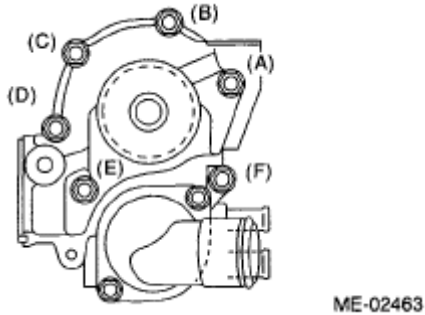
Identifying Tightening Sequence Of Water Pump Bolts
